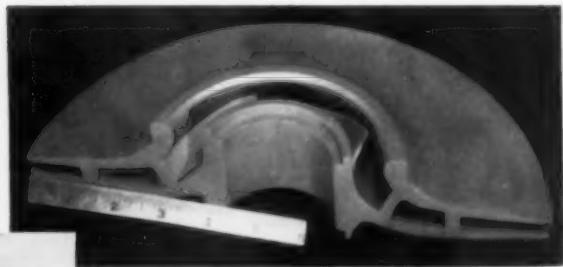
4-Lb. Mounting Bracket for Ram-Jet Engine of Cr-Mo-V Steel, Heat Treated to 180,000 Psi. Ultimate Strength. X-ray inspected for soundness. (Courtesy Engineered Precision Casting Co.)
